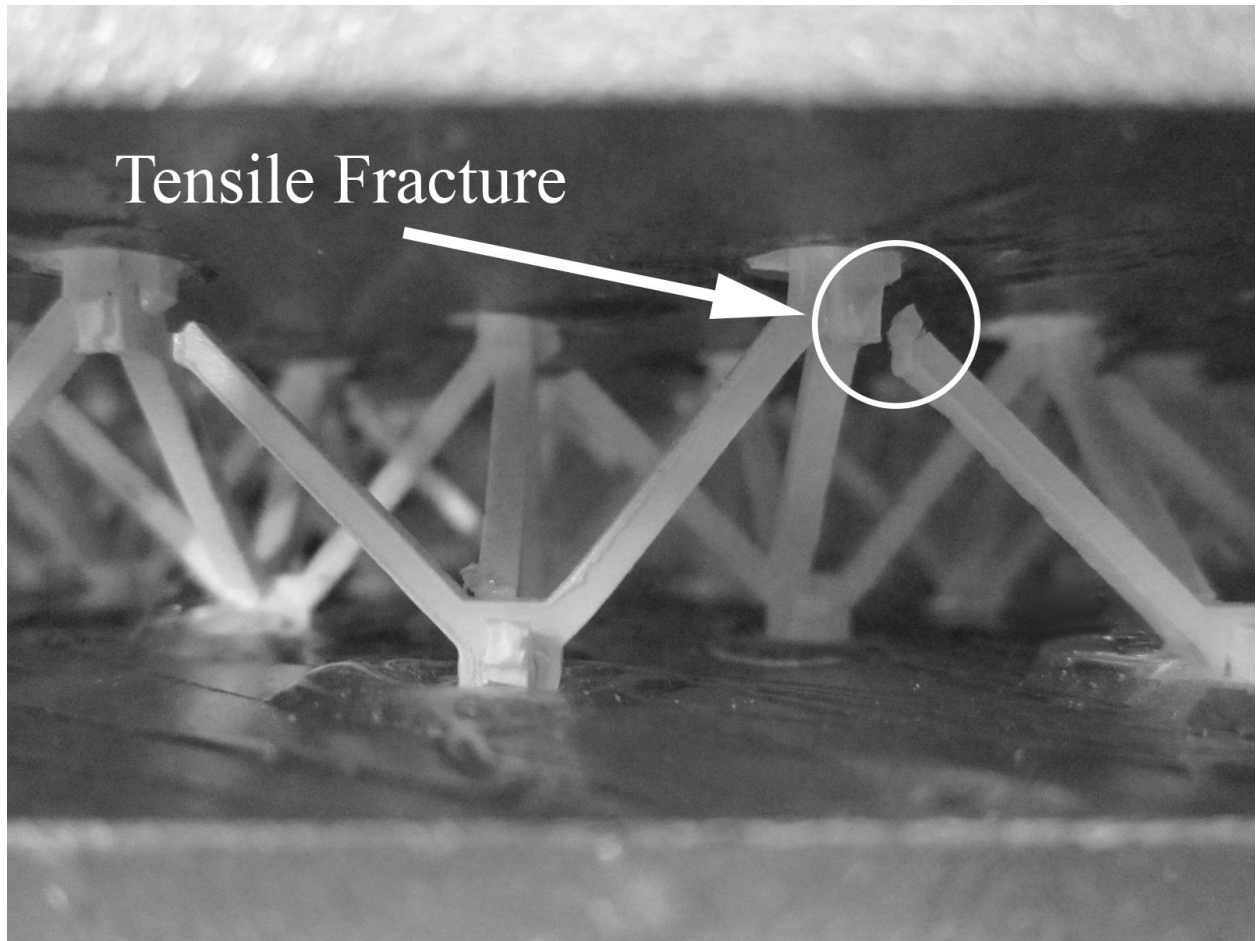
Fracturing on the tensile struts in a truss core undergoing shearing.
